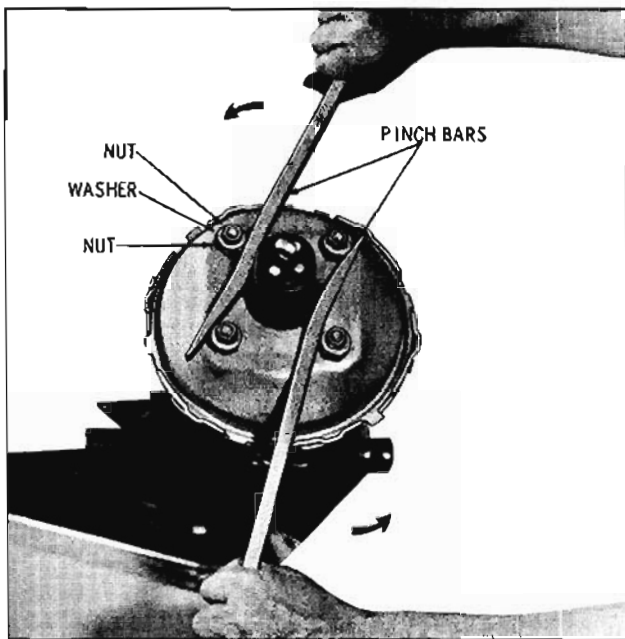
Separating Housings (33, 34, 35, 36, 38 & 39 Series)
